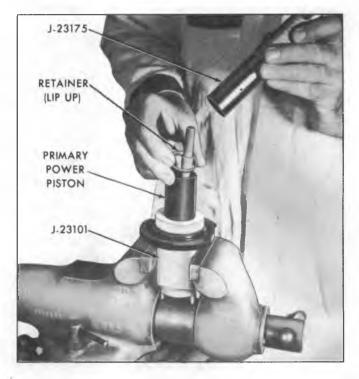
H-Installing Floating Control Valve Retainer with Installer J-23175
